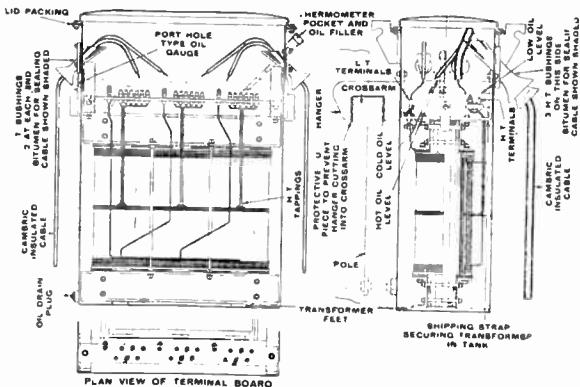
DETAILS OF POLE MOUNTING TRANSFORMER. Showing method of connection for cables and mounting for transformer on cross-arm. (G.E.C.)
